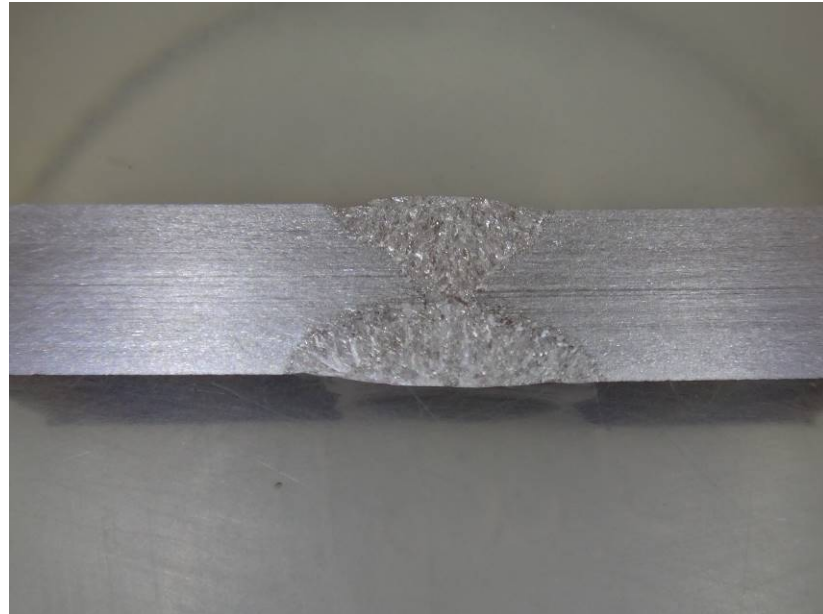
Welded 304 stainless steel ring. Etched with Stainless steel weld etch. The surface was mirror-polished.
